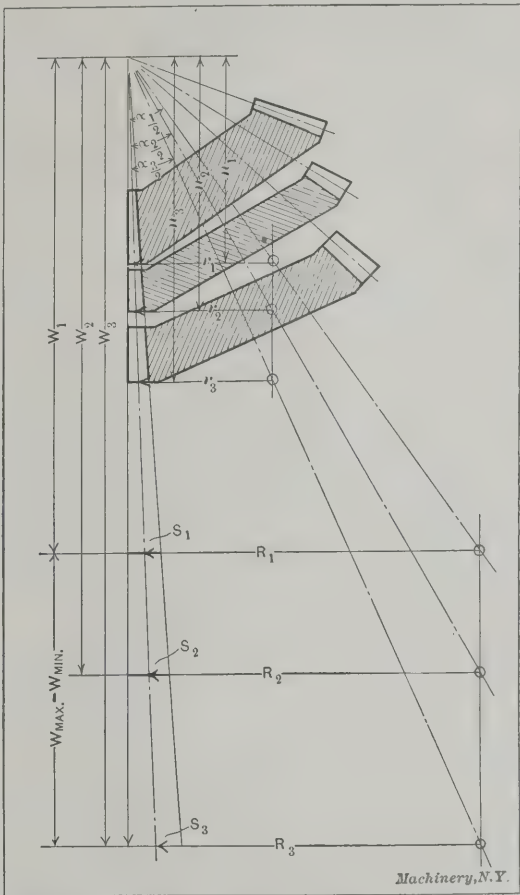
Diagram showing how Correct Bevel Gear Teeth can be cut with a Limited Number of Adjustable Formers
